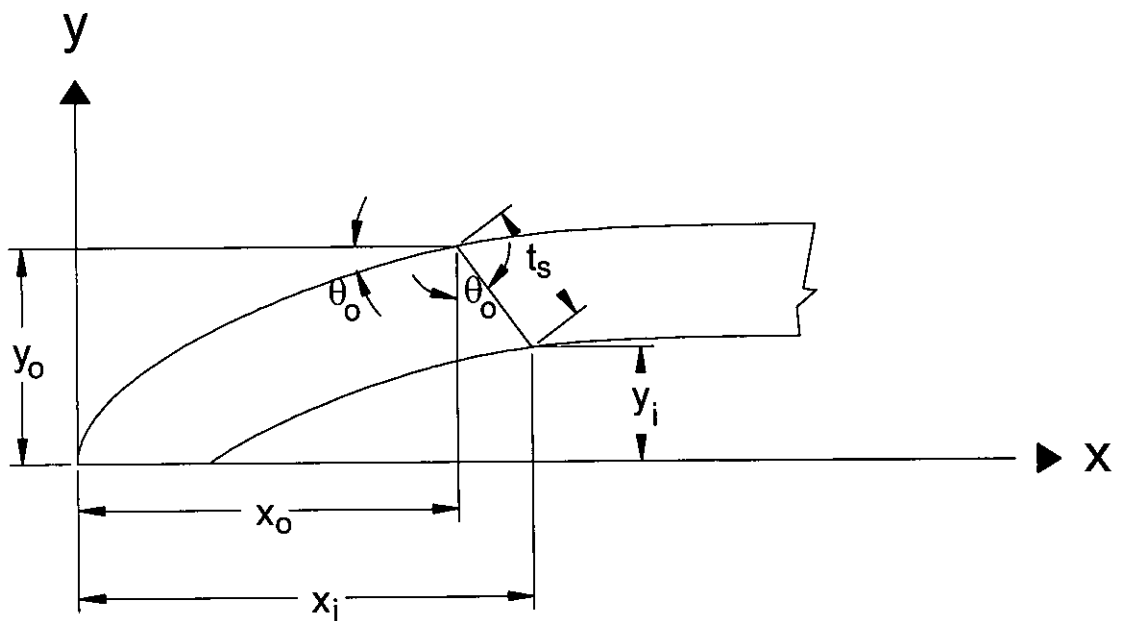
Geometry of inner and outer faces of blade airfoil.
